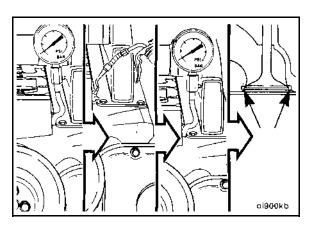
DIAGNOSING IMPROPER VALVE SEALING
